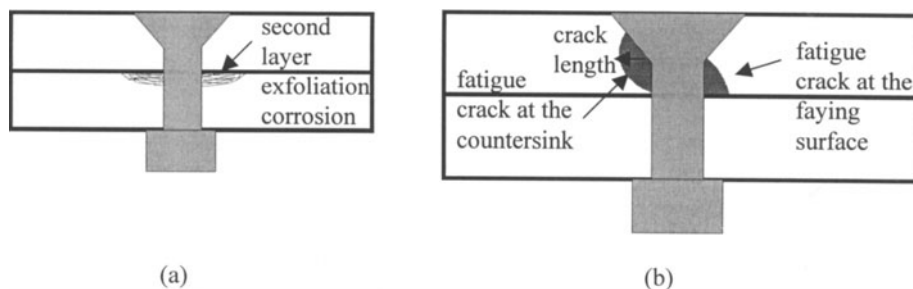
Schematic diagram of (a) exfoliation corrosion in the second layer under a fastener, and (b) a countersink and a faying fatigue crack under a fastener.
